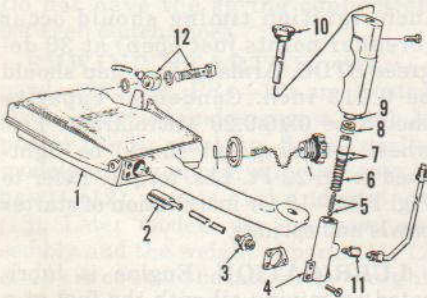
Exploded view of the chain oiler reservoir, manual pump and associated parts. Outlet screen and fitting (12) are for automatic chain oiler on models so equipped.
